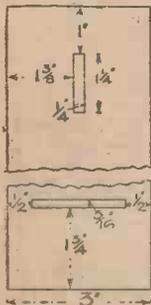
The back board which supports the airplane. Dimensions for the slots are clearly shown.
